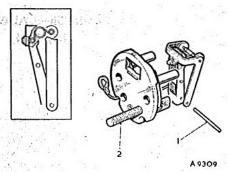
Fitting the rocker assembly to the pedestal, (Inset) the correct position of the centre toggle spring
